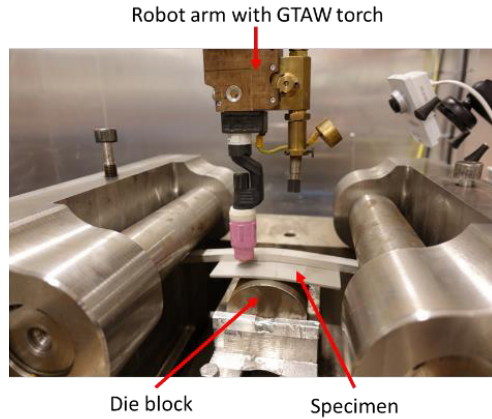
Vareststraint testing setup showing robot arm with GTAW torch, specimen mounted on the machine and die block.
